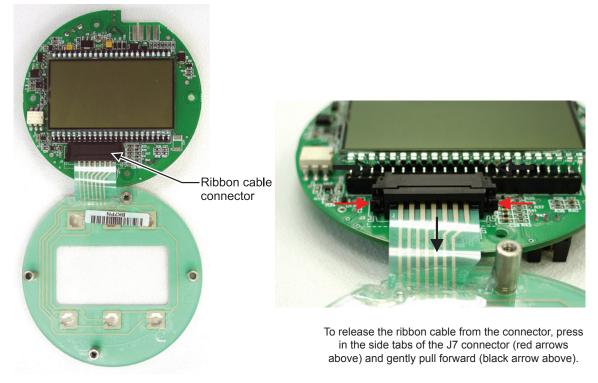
Keypad ribbon cable connector showing location of removal clips
